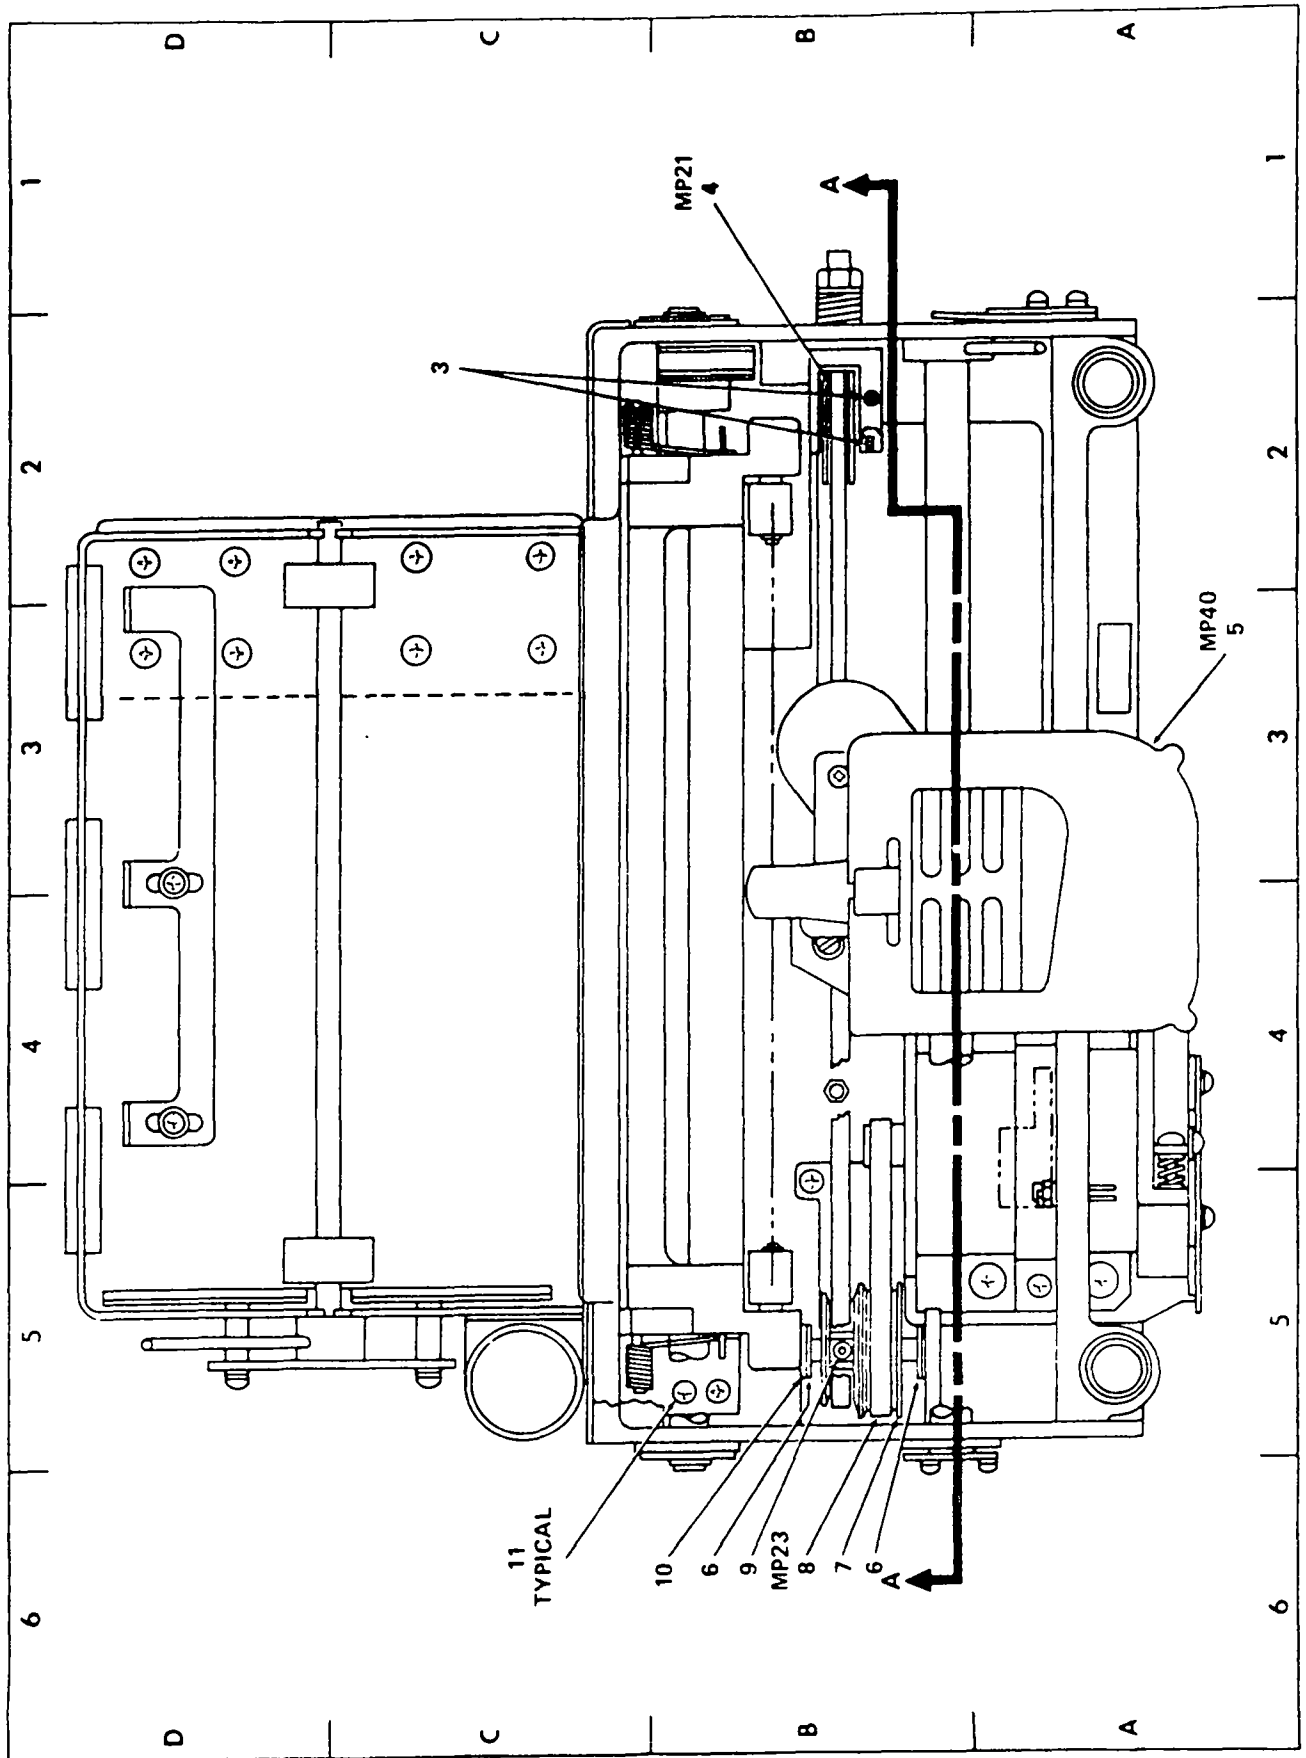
Teleprinter Subassembly (Sheet 2 of 5)
